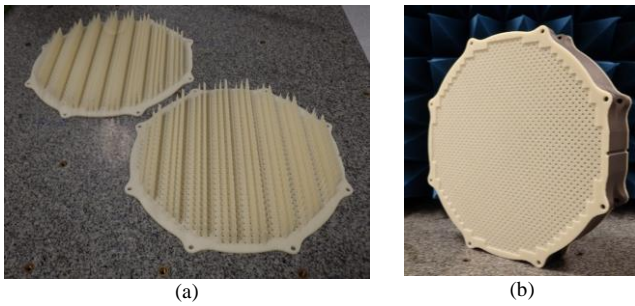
(a) Photograph of printed dielectric parts. (b) Assembled deflector.
